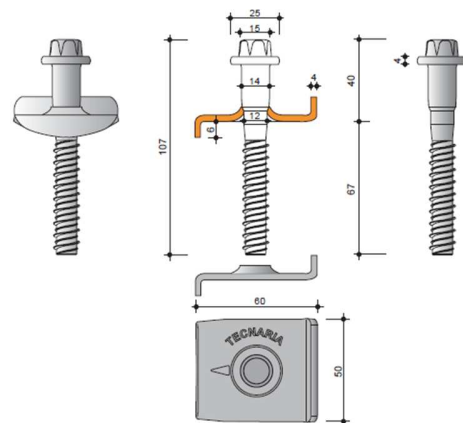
Connectors for Retrofitting of Concrete Diaphragms
